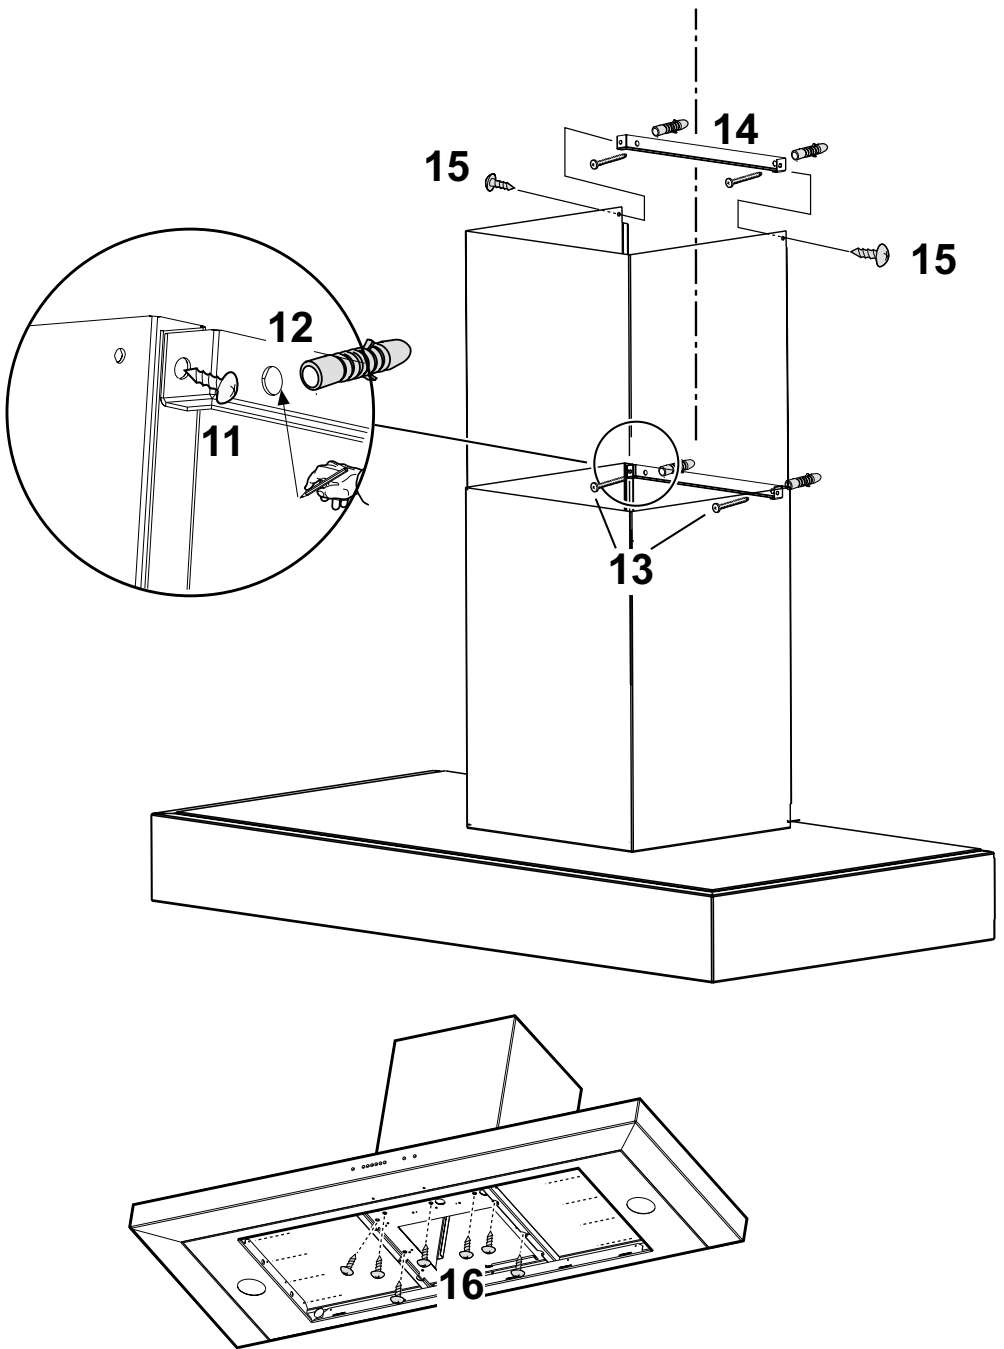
Abb. 2 - Obr. 2 - Рис. 2
